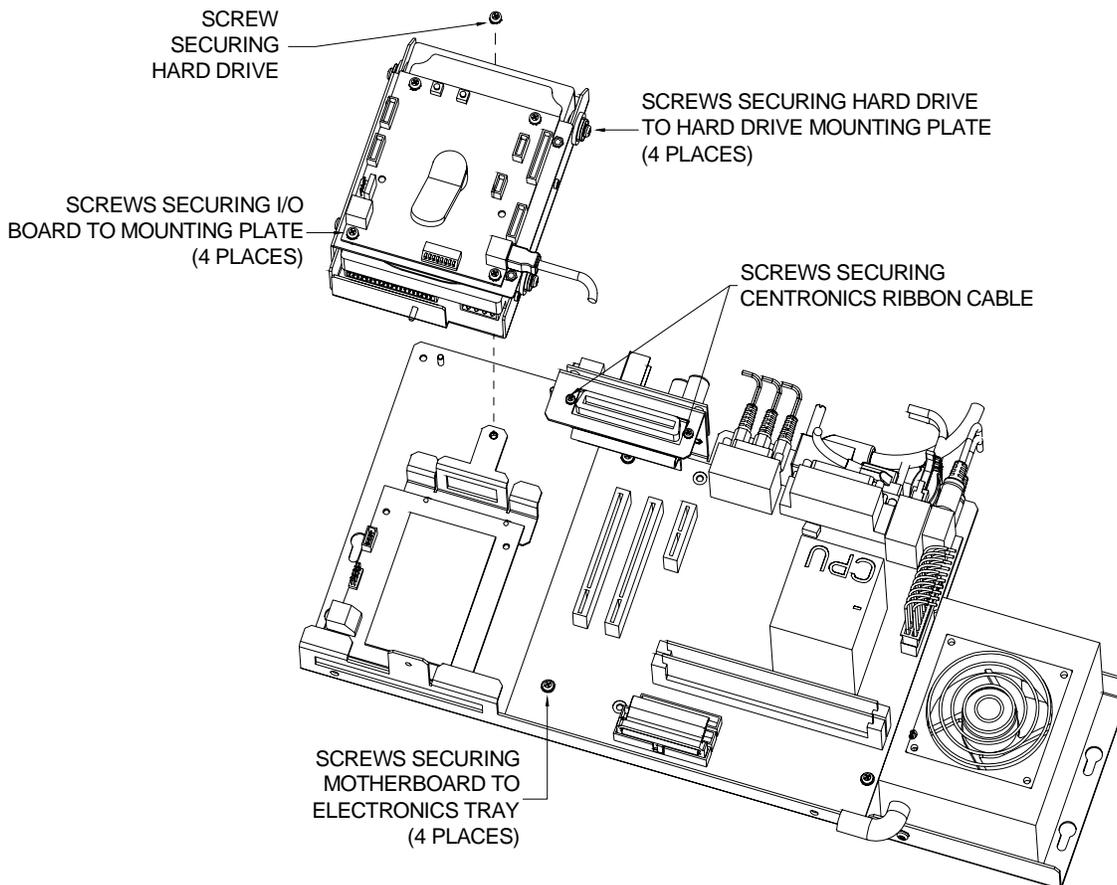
REMOVING HARD DRIVE/MOTHERBOARD
